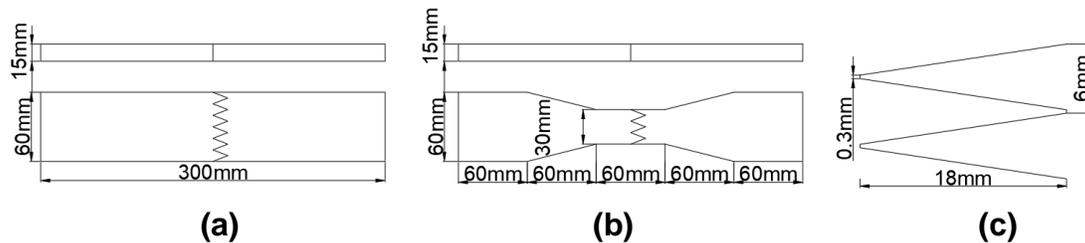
Dimension of bending (a) and tensile (b) test specimen and finger profile details (c)
